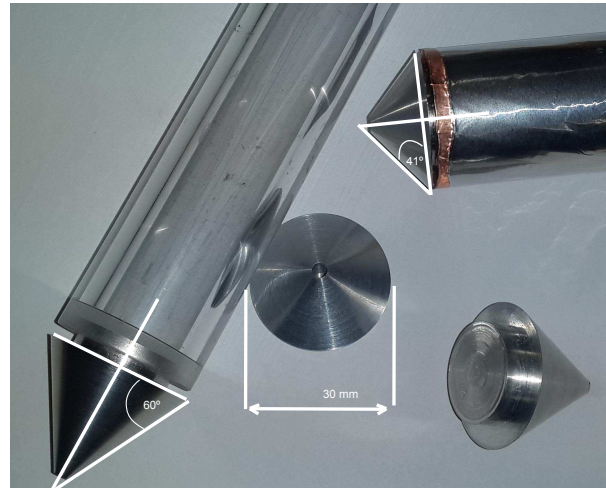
Aluminium matching pieces for new increased diameter conductor. Shown is two sets of matching pieces of profiles 41° and 60° . The new conductor diameter is 30 mm.
